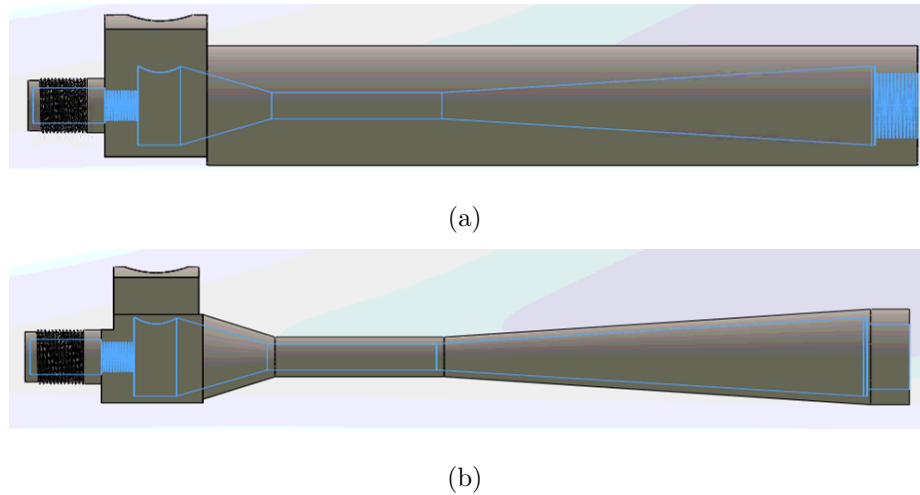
(a) CAD rendering of ejector design for traditional manufacturing; (b) CAD rendering of ejector design for additive manufacturing.
